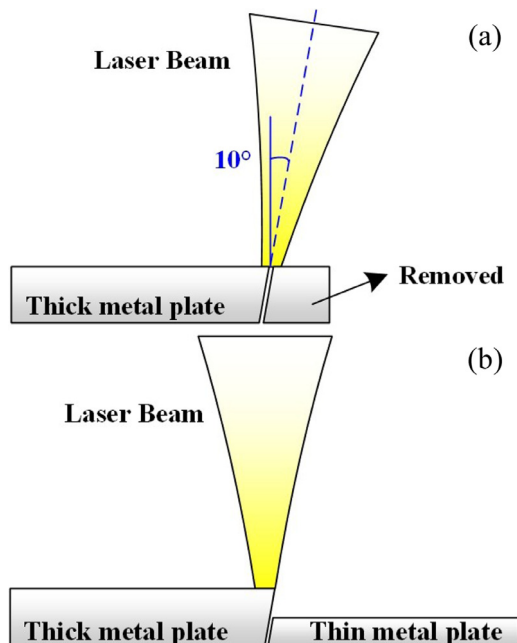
Schematic of an eave-like model for the welding of TWBs. (a) Pre-cutting. (b) Welding.
